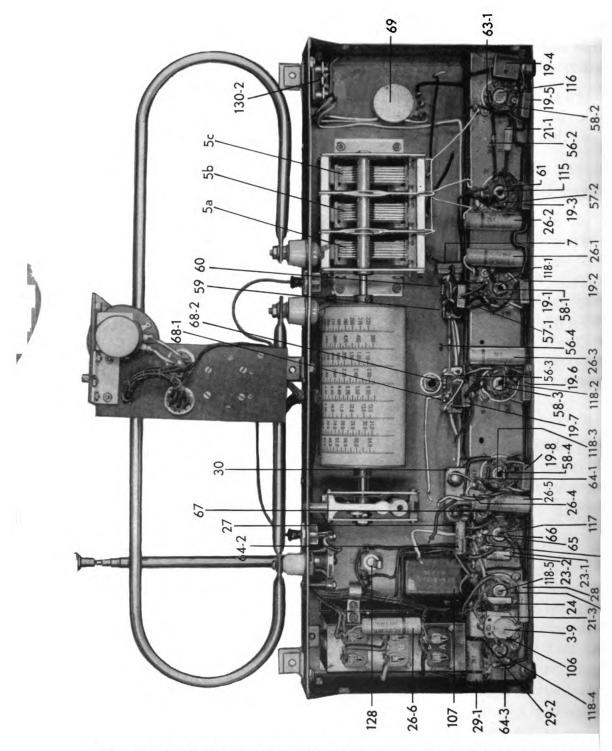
Radio Receiver BC-792-A, Rear View With Band Switch Assembly Removed From Chassis, Showing Reference Numbers of Parts
